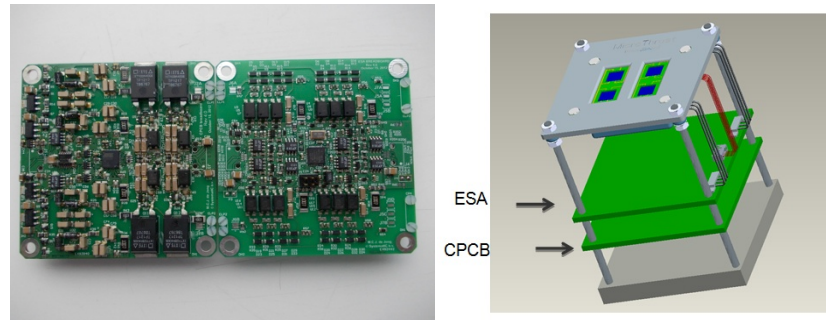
ESA and CPCB PCB (left picture) and BB model with ESA and CPCB (right side), supplying 4 bipolar channels for emitter, extractor and accelerator electrodes.
